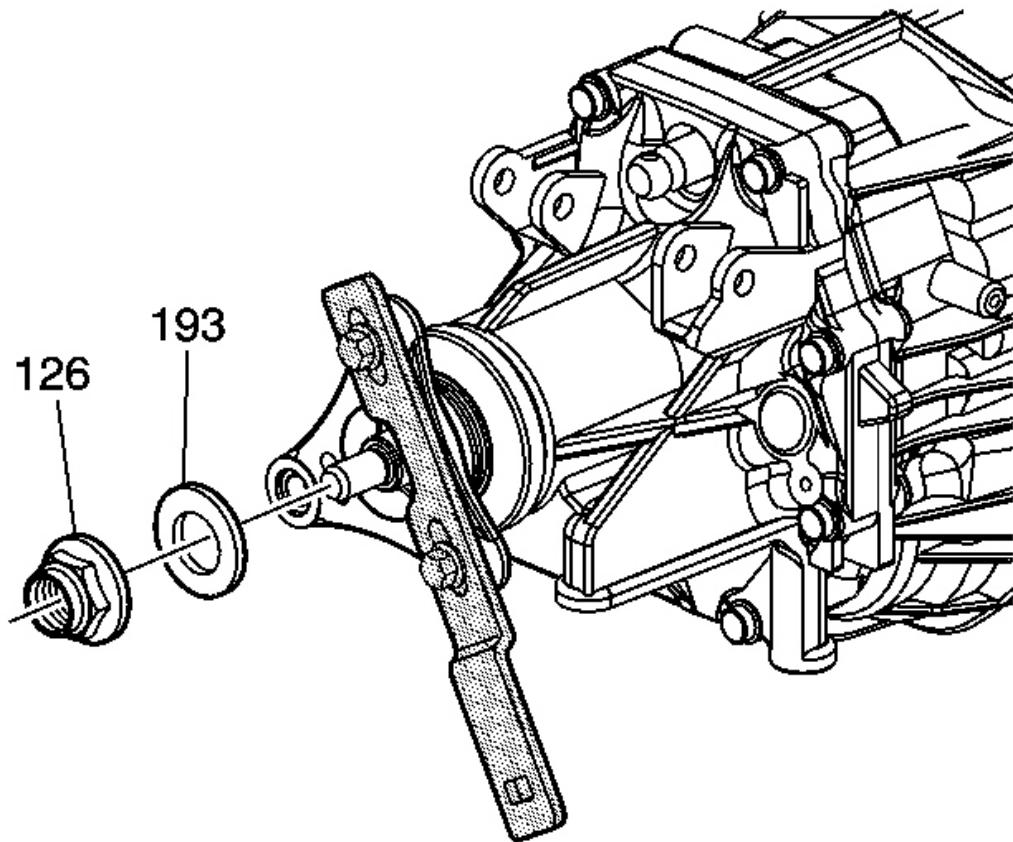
Removing Propshaft Flange Nut & Propshaft Flange Fluid Seal
